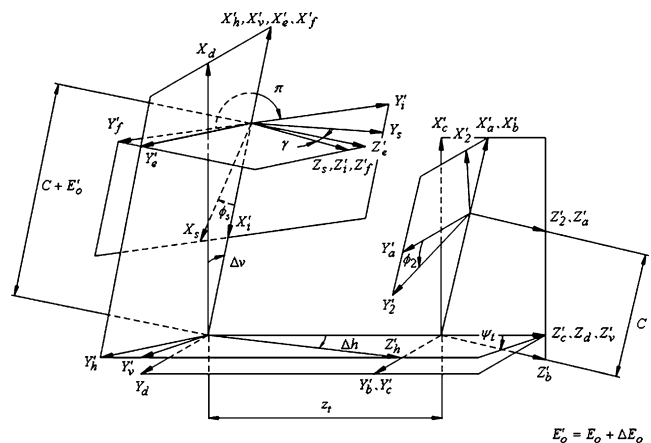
Coordinate system of the gear shaving machine with considerations of cutter assembly errors
